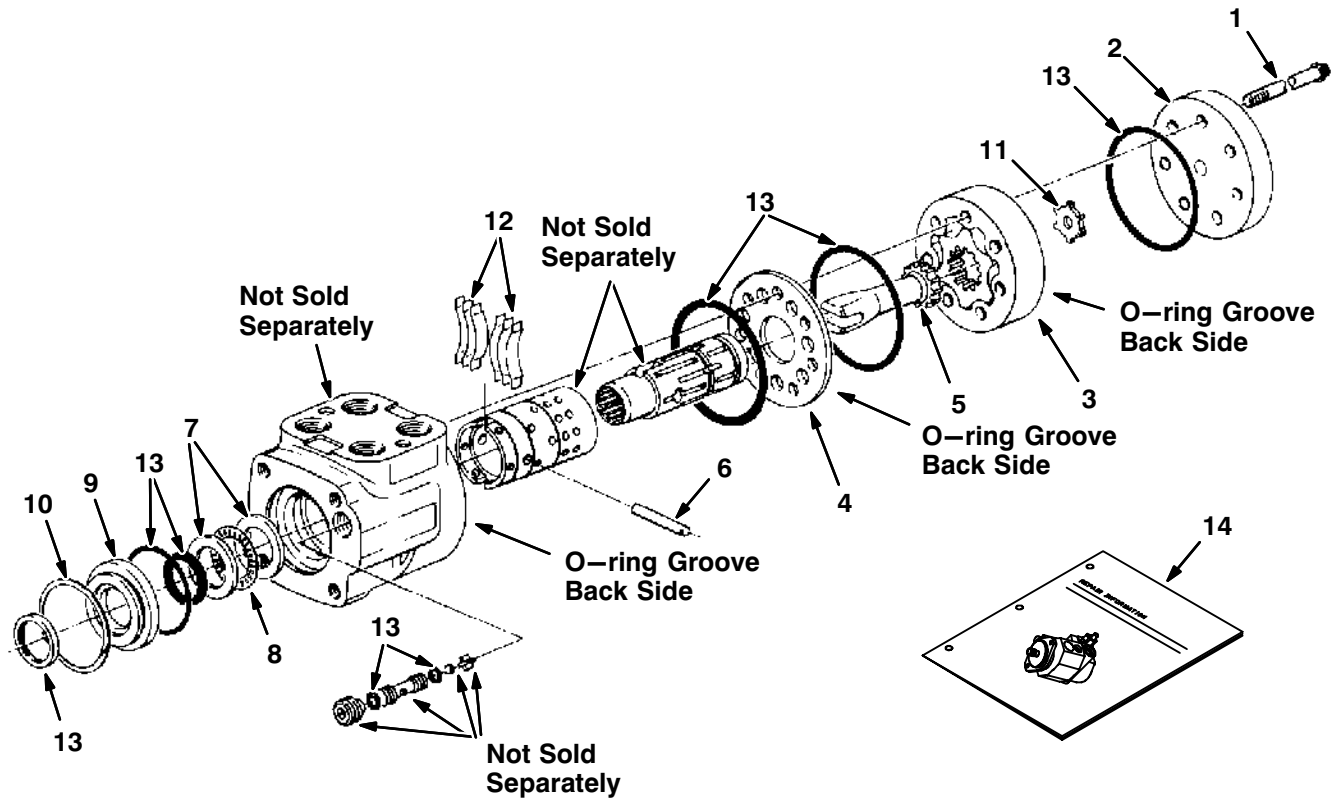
Hydraulic Steering Valve Breakdown, 57929
